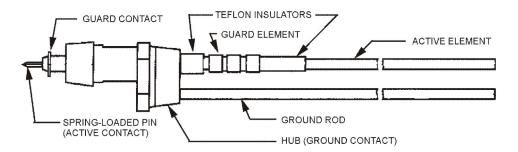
Standard L870 Probe, Descriptive Drawing Specifications
